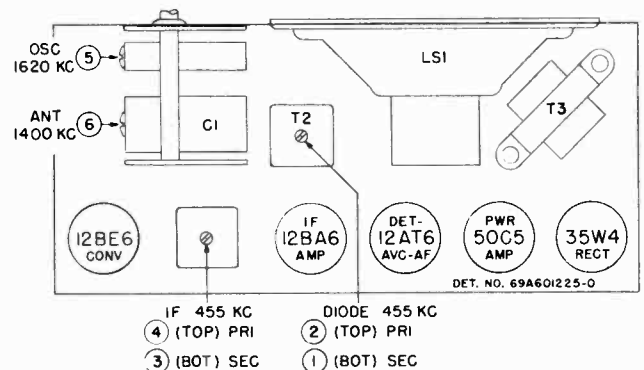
TUBE AND TRIMMER LOCATIONS
